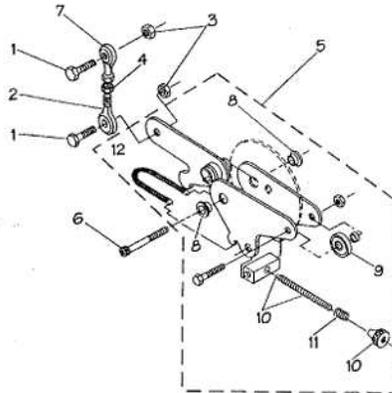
BELL CRANK & GRINDER HEAD
